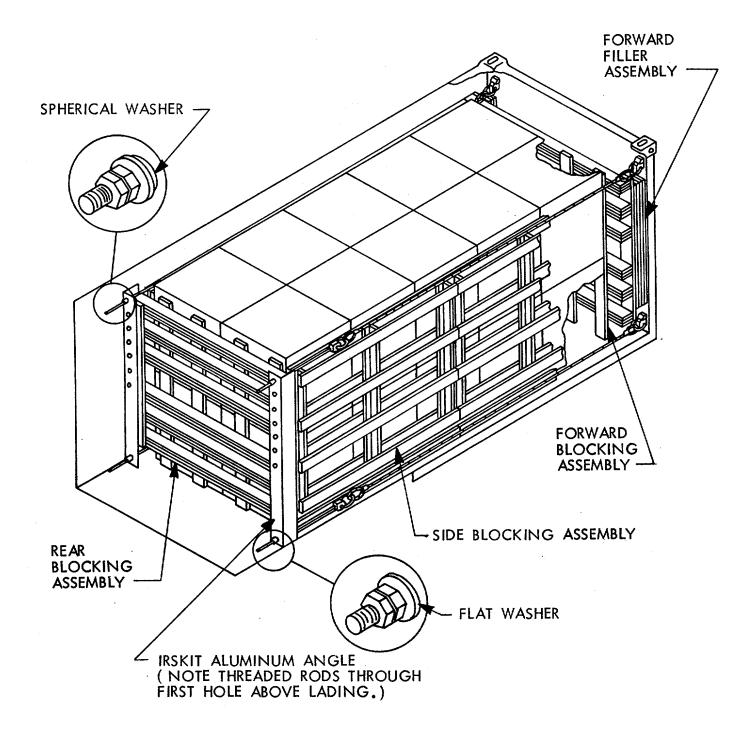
Typical loaded container with IRSKIT hardware and wood dunnage installed.
